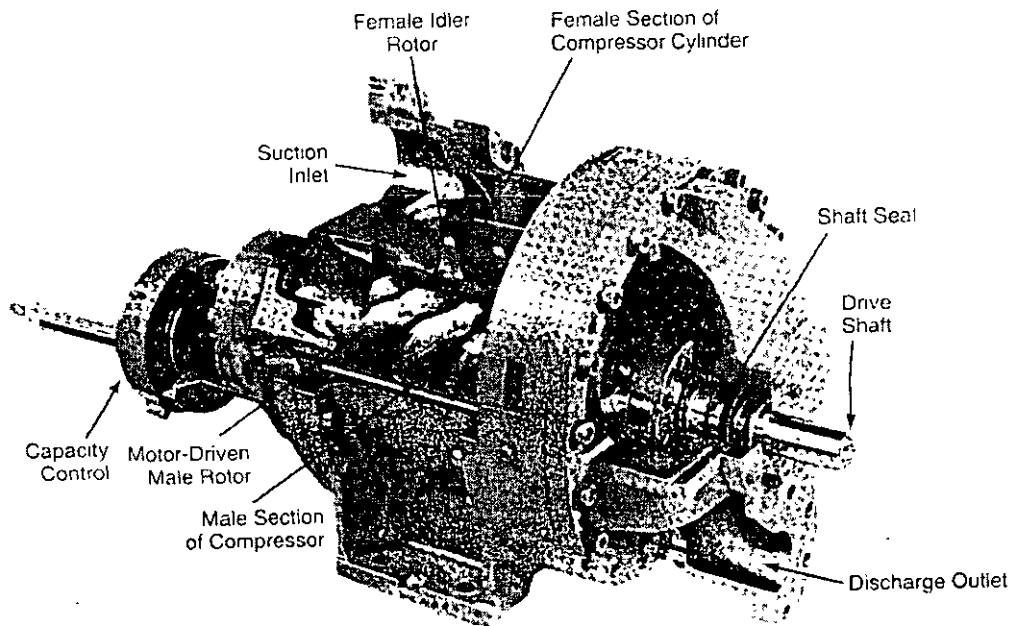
Screw compressor which uses a matched set of helical rotors. (Dunham-Bush, Inc)
